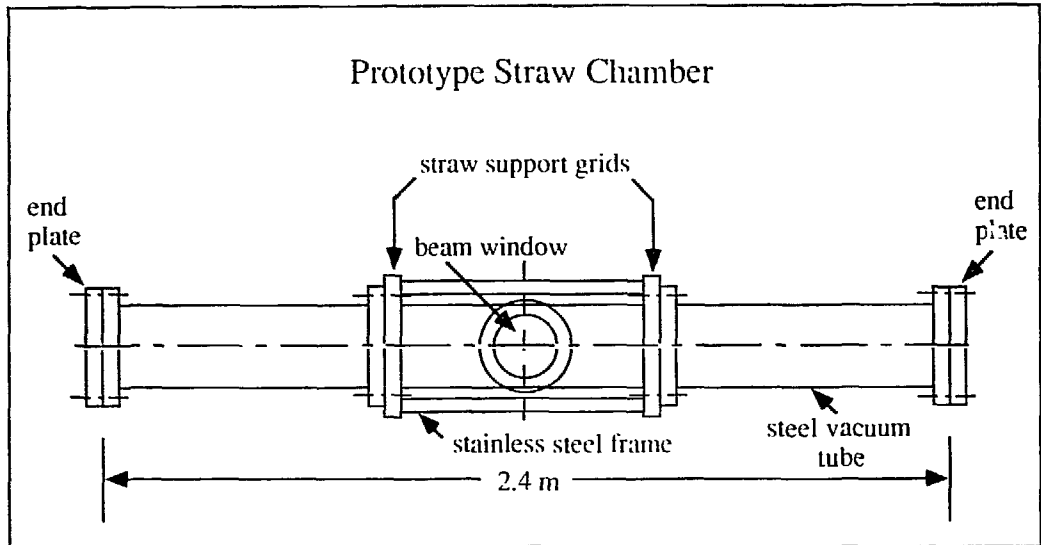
Side view of prototype straw chamber vacuum tube.
